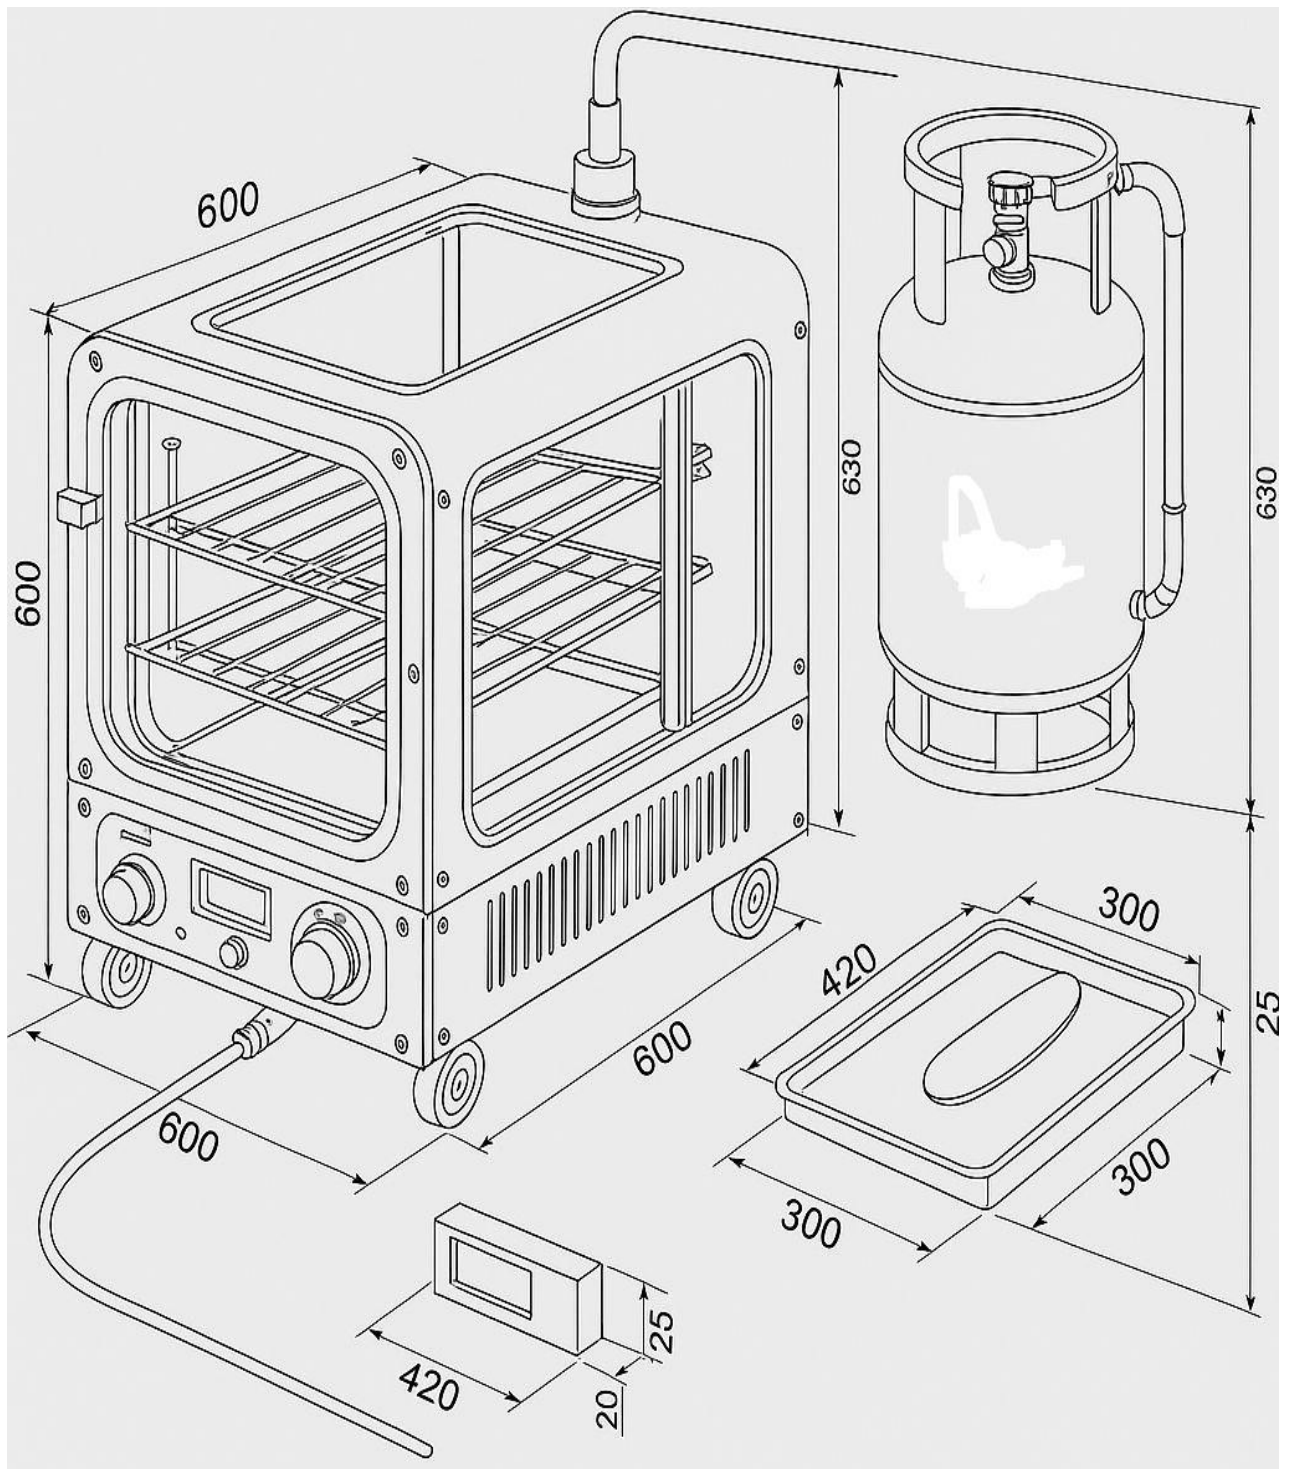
Multipurpose Gas-Powered Oven (Assembly Drawing I)
